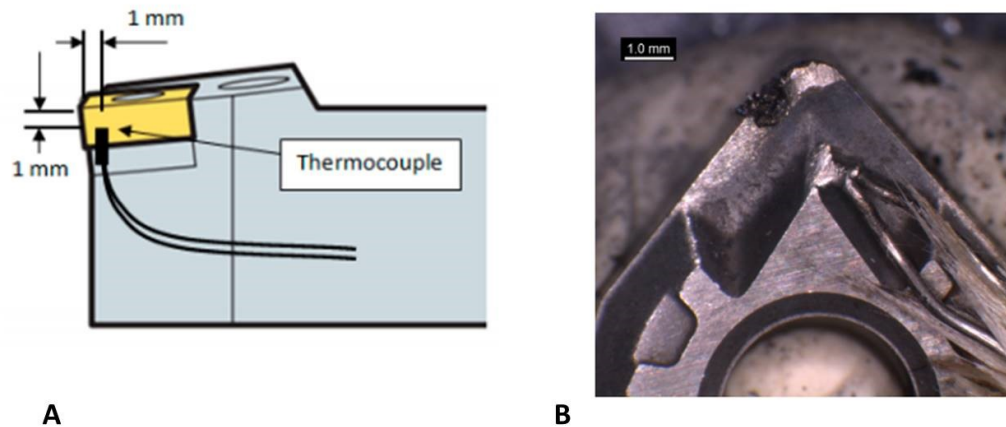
Temperature measurement trough thermocouple: (A) inside the insert [53], (B) stick onto the tool rake [51]
